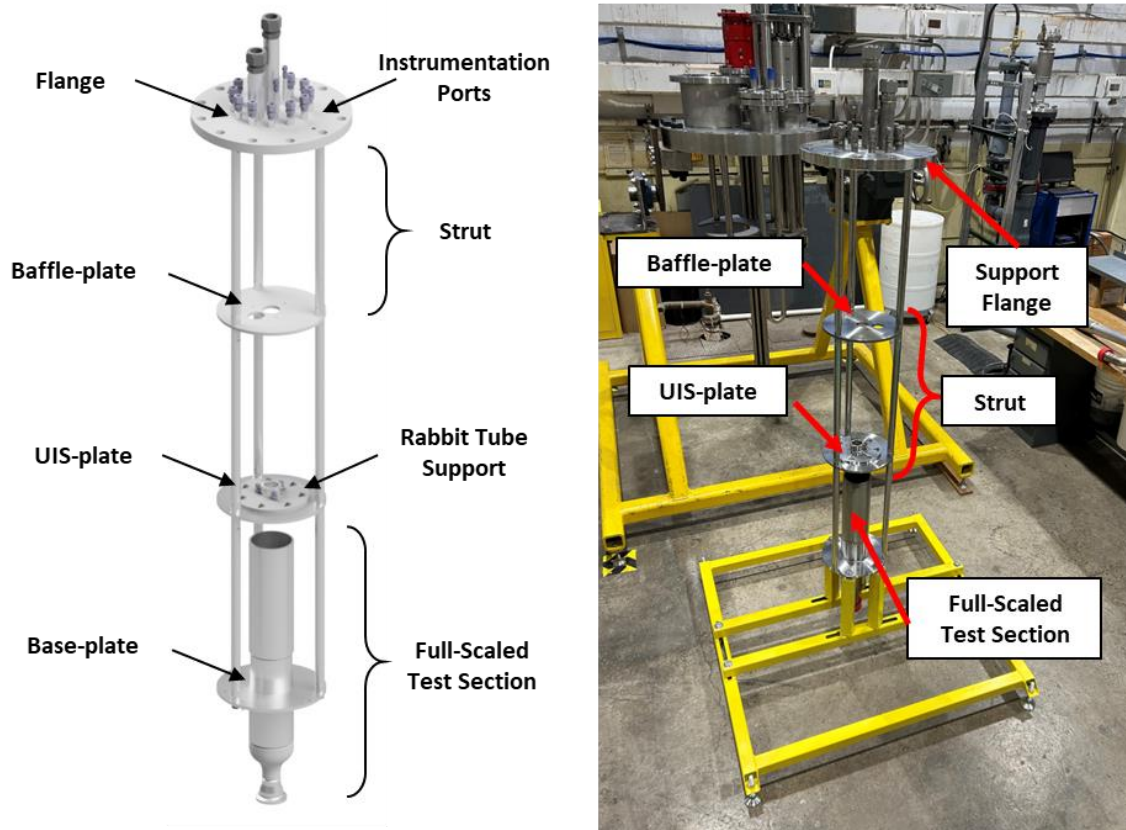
Assembled Full-Scaled Test Section stack-up.
